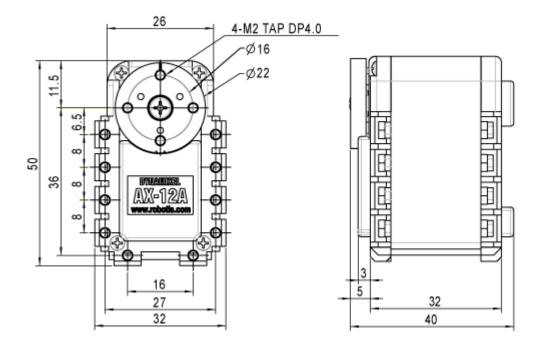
Dynamixel AX-12A drawing. Extracted from emanual of robotis [18].
